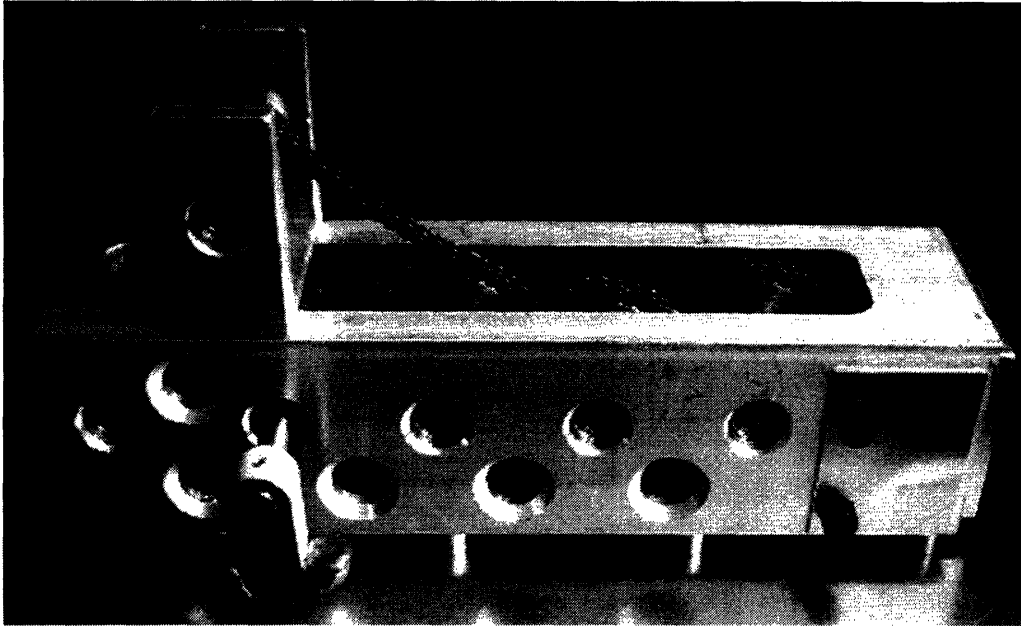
Photograph of Non-crank Side of Chain Drive Vibrating Pedal (CDVP).
